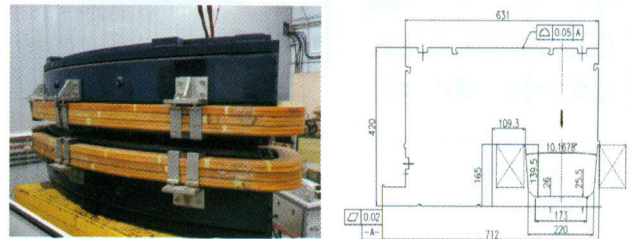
Prototype dipole magnet assembly (half lamination details shown at right).
